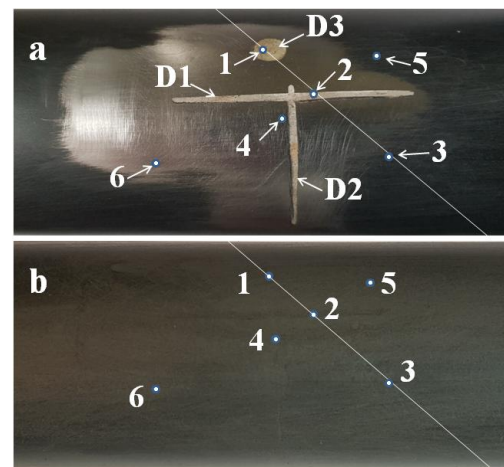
Photographs of ferromagnetic samples section of pipe with artificially created defects: a – layout of defects D1 – D3 with points and lines of section L0 of thermographic inspection; b – visible side of pipe section with painted coating
